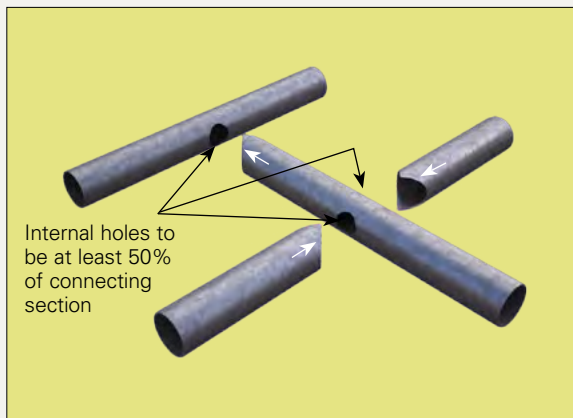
Internal Vent Holes – Drawing to clearly show items are "Internally Vented" with Inspection Holes - Preferred
